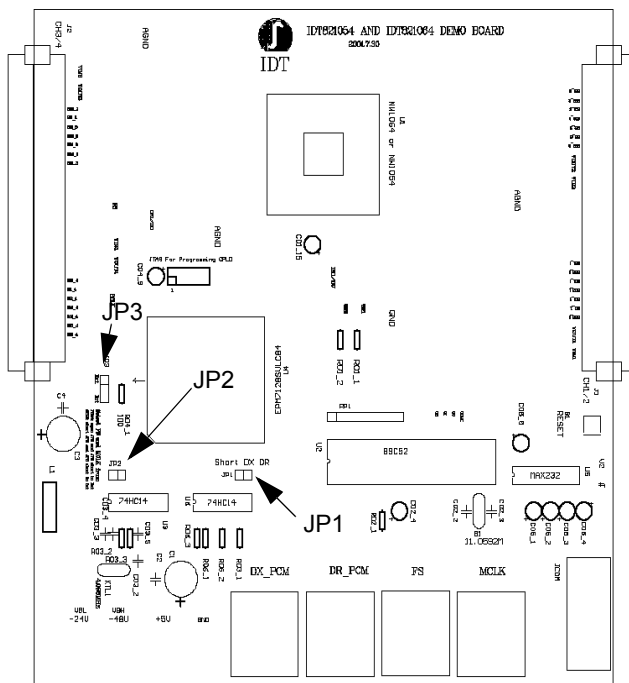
IDT821064 MOTHER BOARD COMPONENT LOCATION
